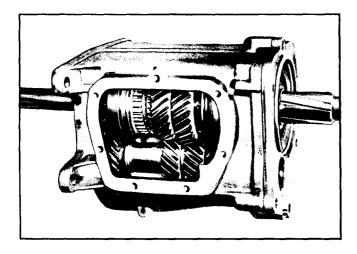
D-19 3rd & 4th Speed Synchronizer Sleeve in 4th Gear Position
